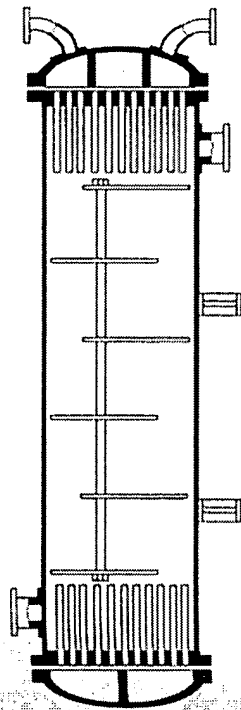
Heat exchanger with fixed tube plates (four tube, one shell-pass)
